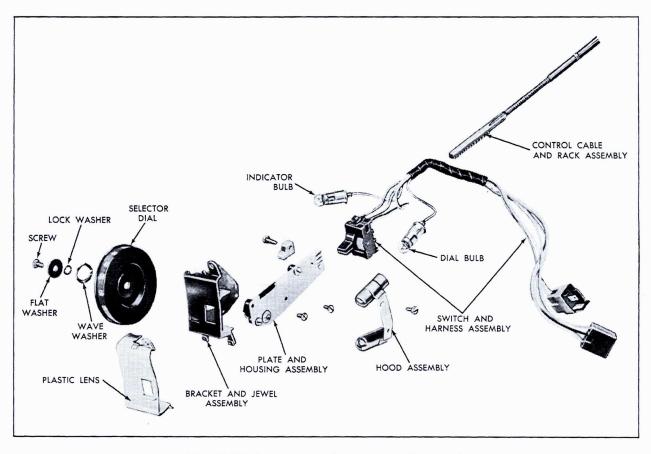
Selector Control Disassembled (Exc. 693)
